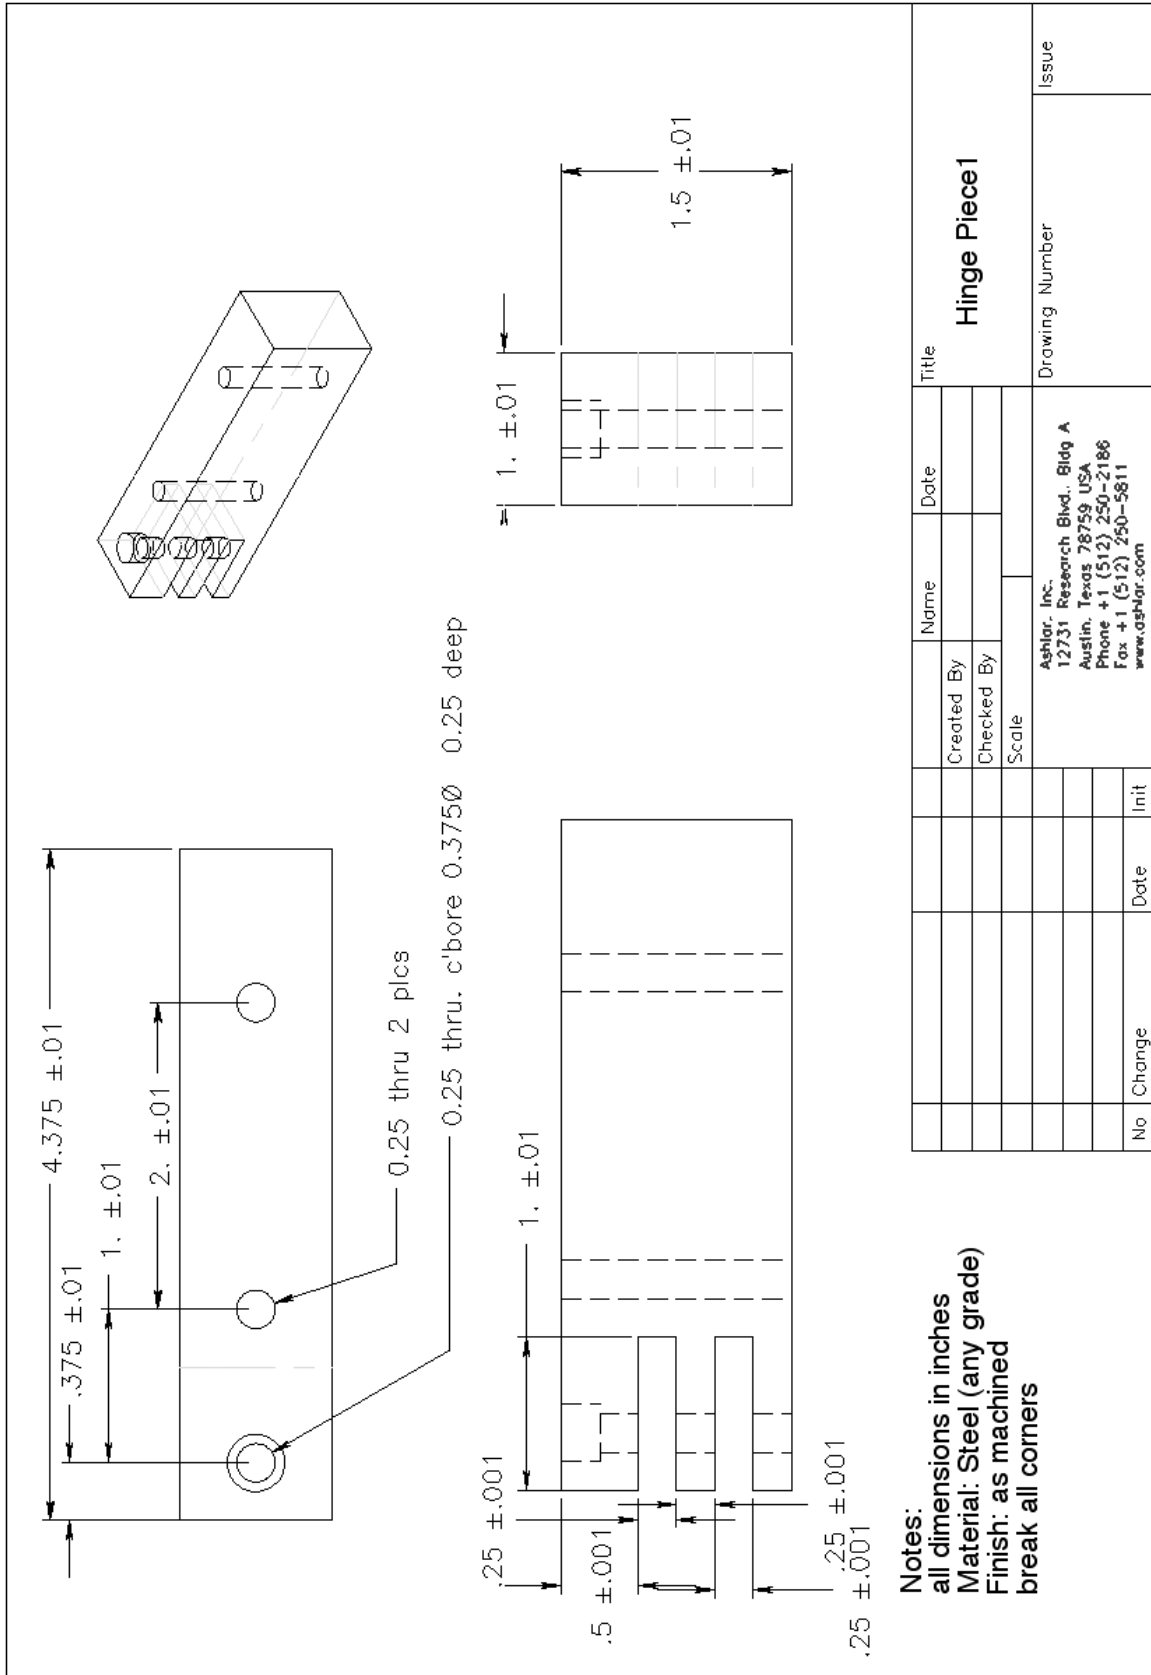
Drawing of Artificial Crack System Hinge Piece 1.
